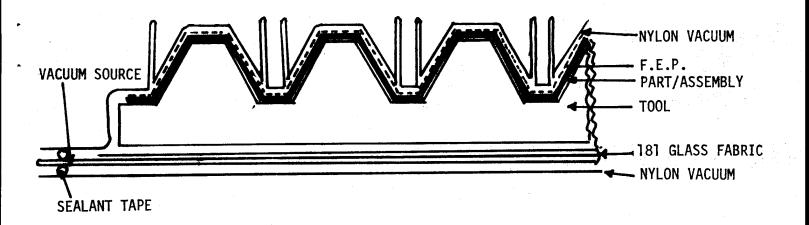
A VACUUM BAG SCHEMATIC CORRUGATED SECTION LAYUP- END VIEW
